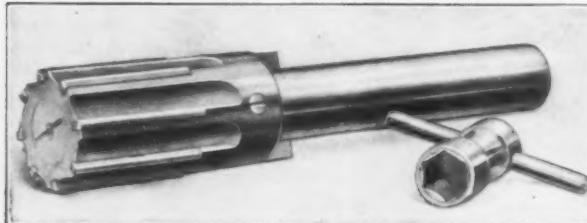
The One-Lock Adjustable Reamer, Assembled.
